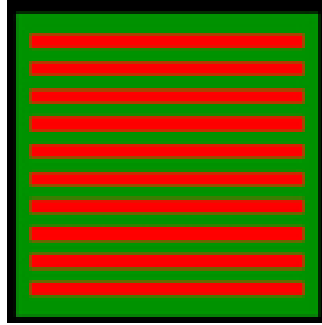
Illustration of Thick Film Au Die Attach Line Pattern Printed on the Die Attach Pad
